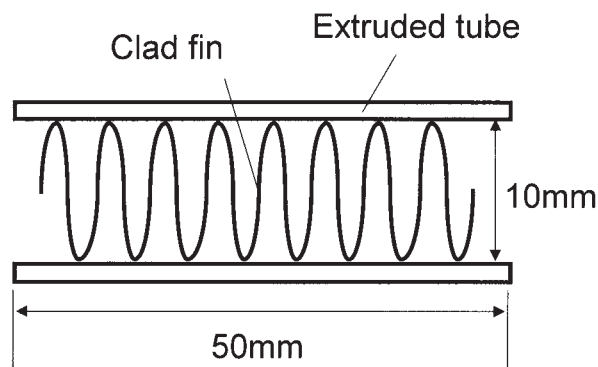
An assembly of mini-core with clad fin and extruded tube.
